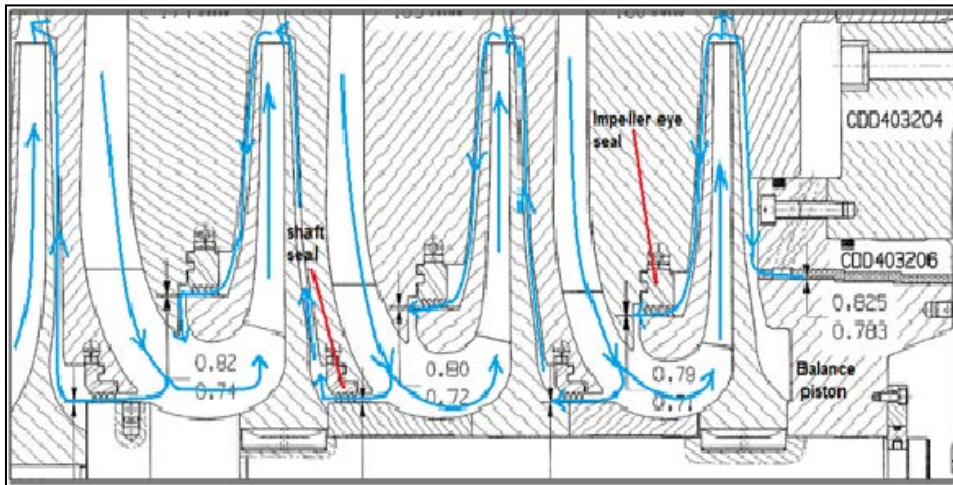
7 Partial section through a typical centrifugal compressor showing Eye, Shaft and Balance piston seal as well as typical leakage paths
